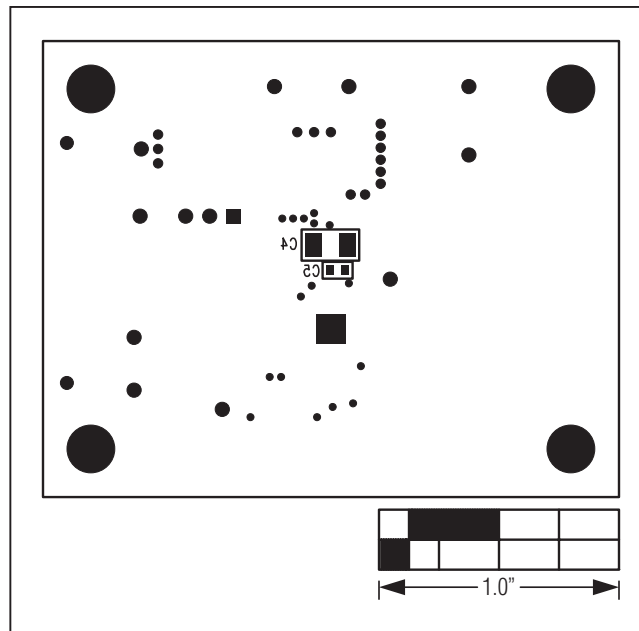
MAX16907 EV Kit Component Placement Guide—Solder Side
